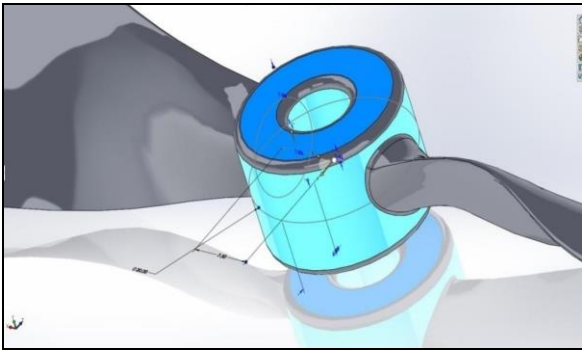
PROPELLER HUB WITH DIMENSIONS
